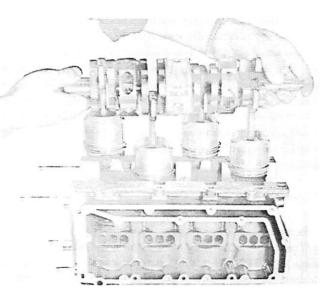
Removing (and Installing) Crankshaft Assembly from Cylinder Block
